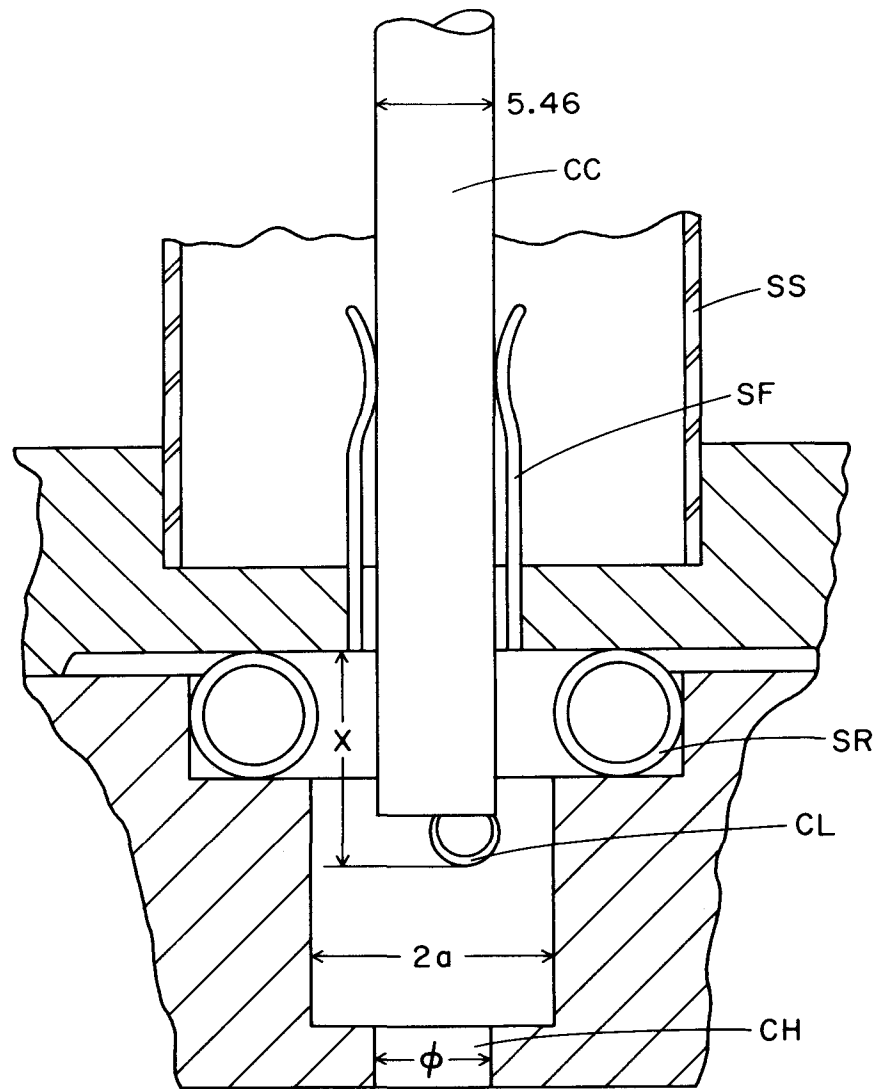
Details of the coupling mechanism. Legend: CL = coupling loop, CH = coupling hole, SR = spring ring, SF = spring finger, CC = coaxial cable, SS = stainless steel vacuum pumpout, x = position of loop.
